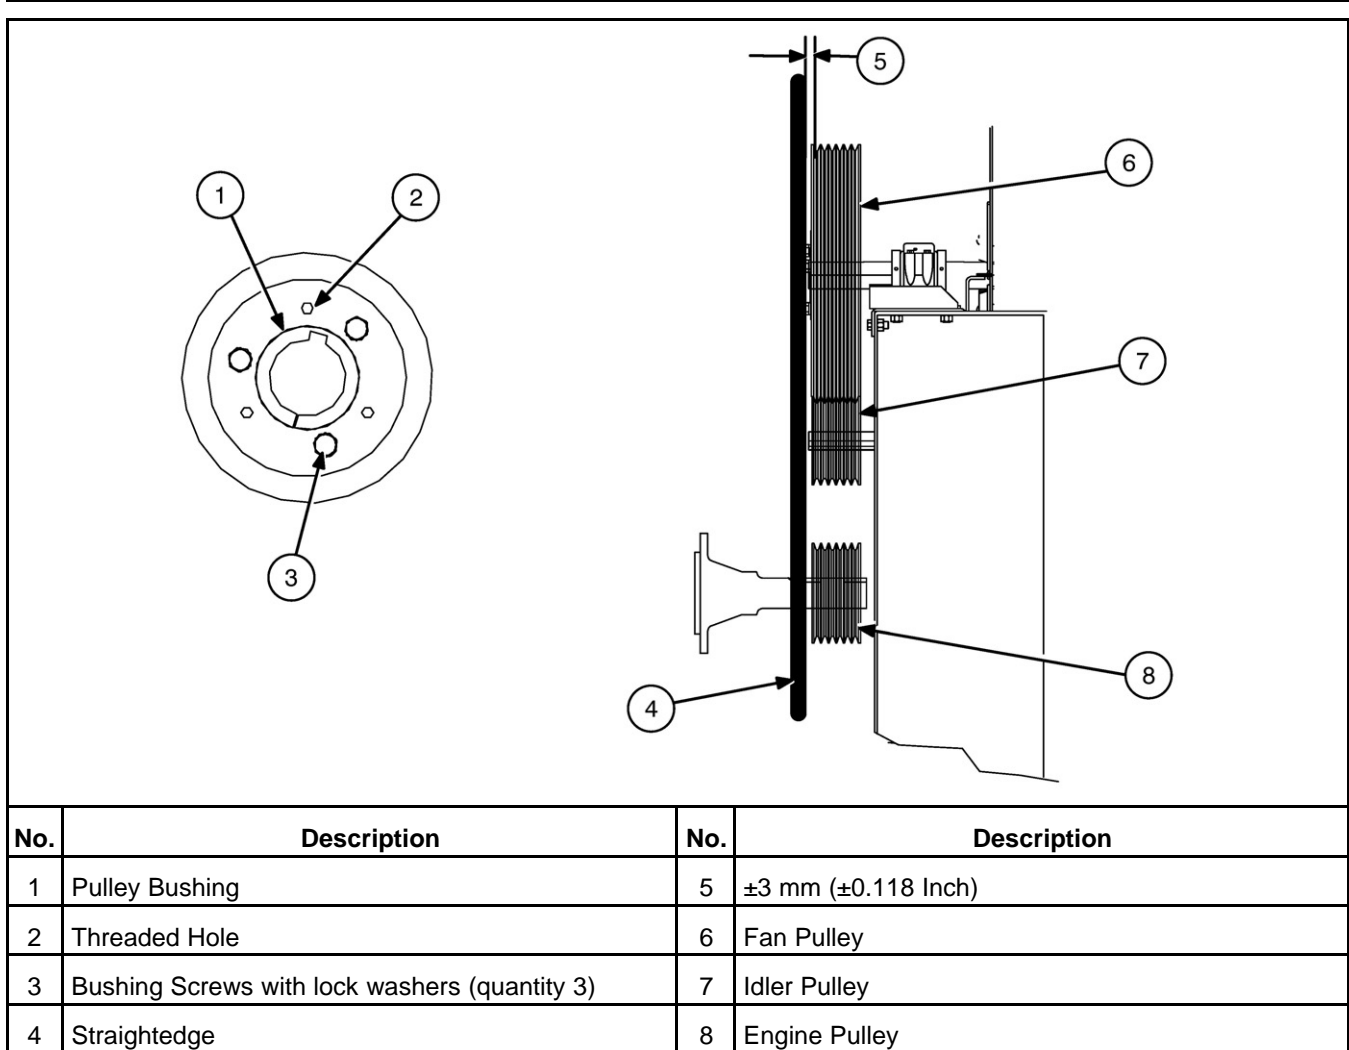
ALIGNING THE ENGINE PULLEY TO THE FAN DRIVE PULLEY
